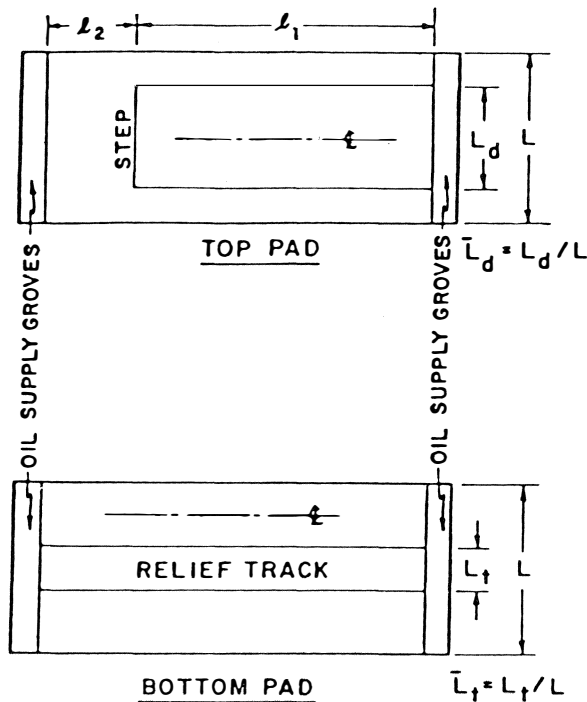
Pressure Dam Schematic, Top and Bottom Pads.
